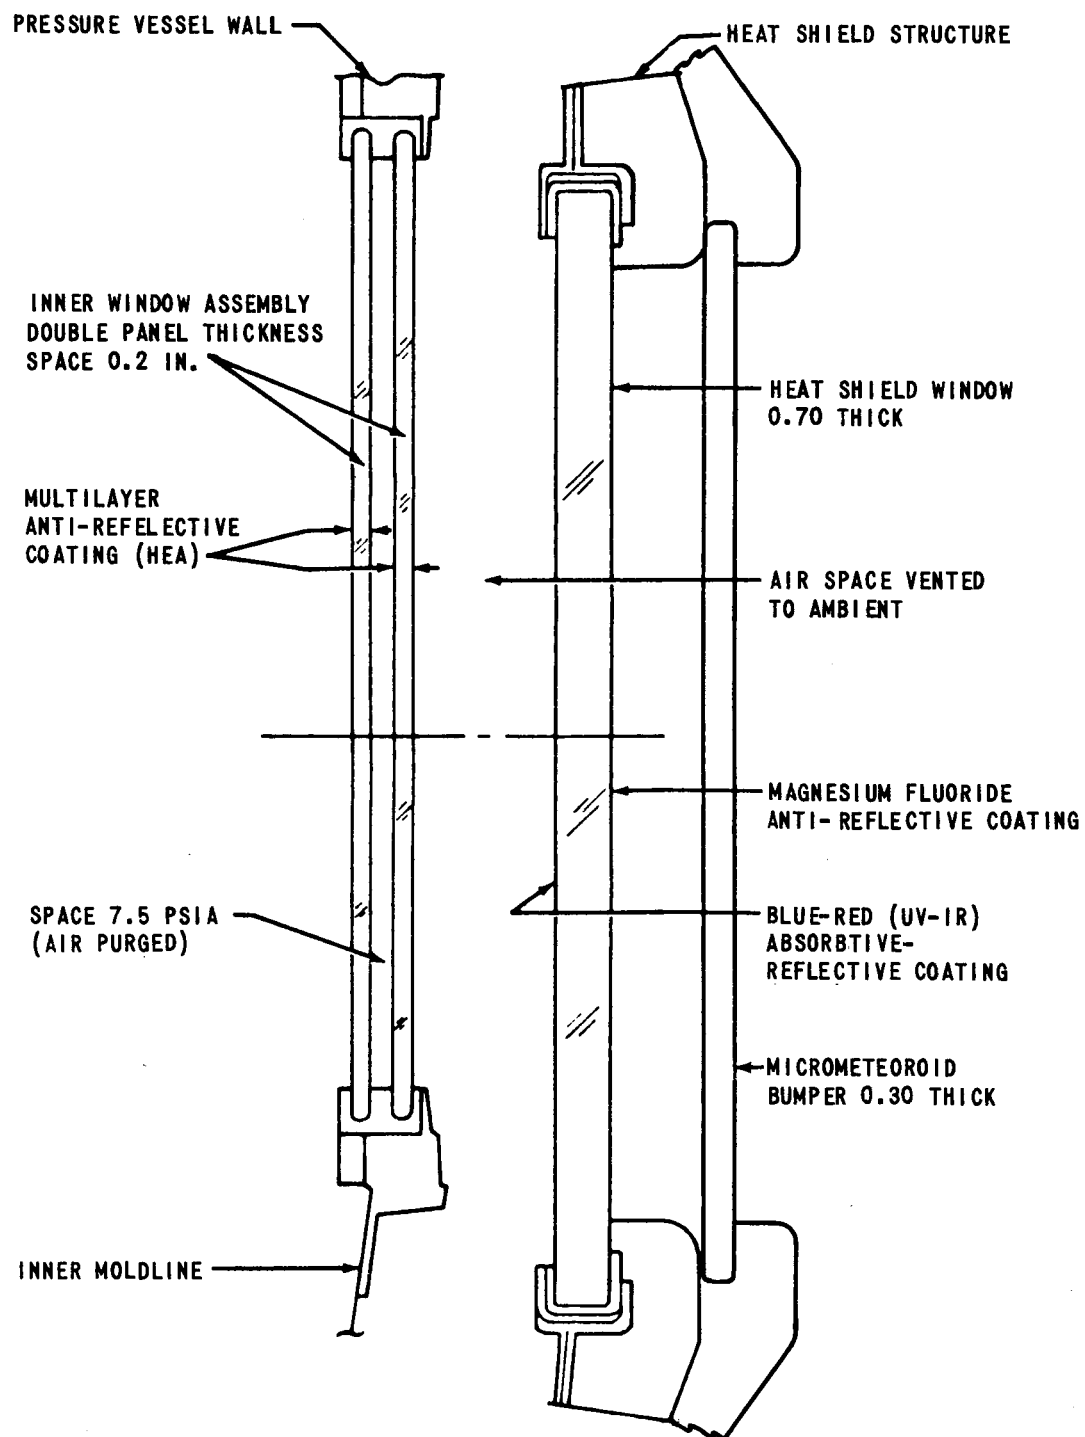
CUTAWAY SHOWING CM WINDOW ASSEMBLY
